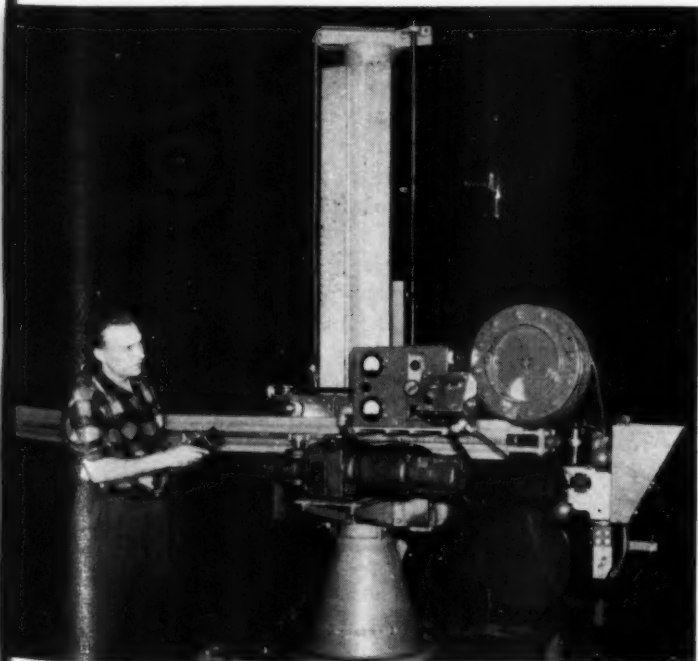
Herrick welding fixture which utilizes traction type infinite-range transmission to vary ram speeds from zero to 100 in. per minute. Right-angle output gearing on the transmission drives the ram through a mating rack to provide a compact mounting. Photo, courtesy Graham Transmissions Inc.
